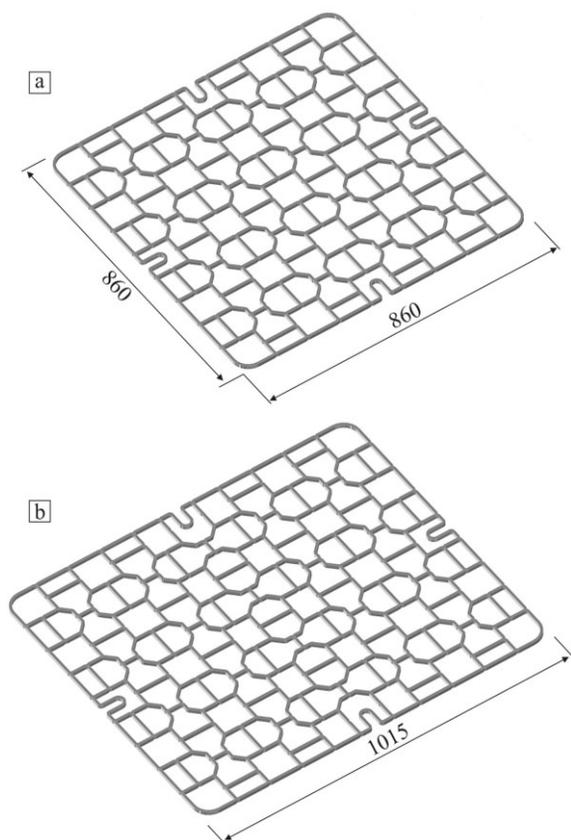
Grate: a) square shape; initial dimensions, b) rectangular shape after modification
